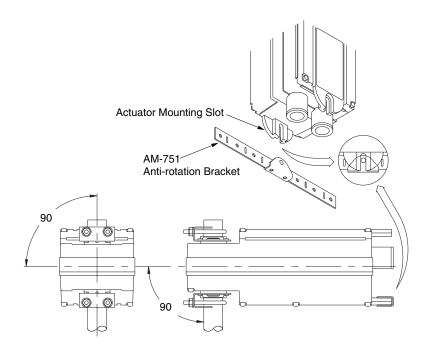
Mounting Anti-rotation Bracket to Actuator.
